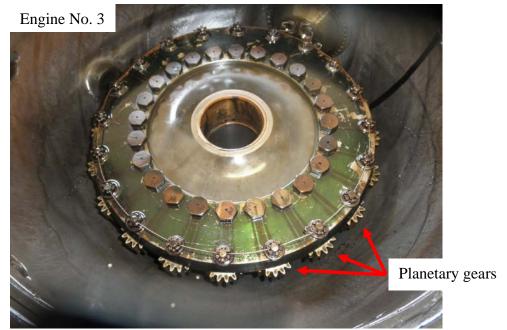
View of the planetary gear carrier showing it was intact and all of the planetary gears were in place.
